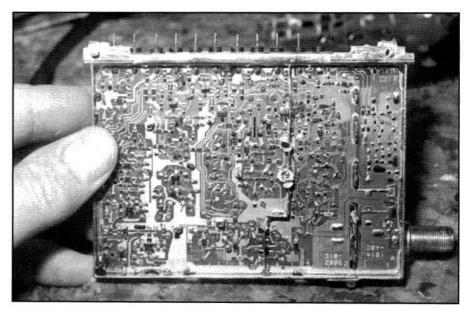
Surface mounted devices (SMD) are located on the pc foil side of the small U/V tuner. Larger, through-hole components are mounted on the other side of the board.
